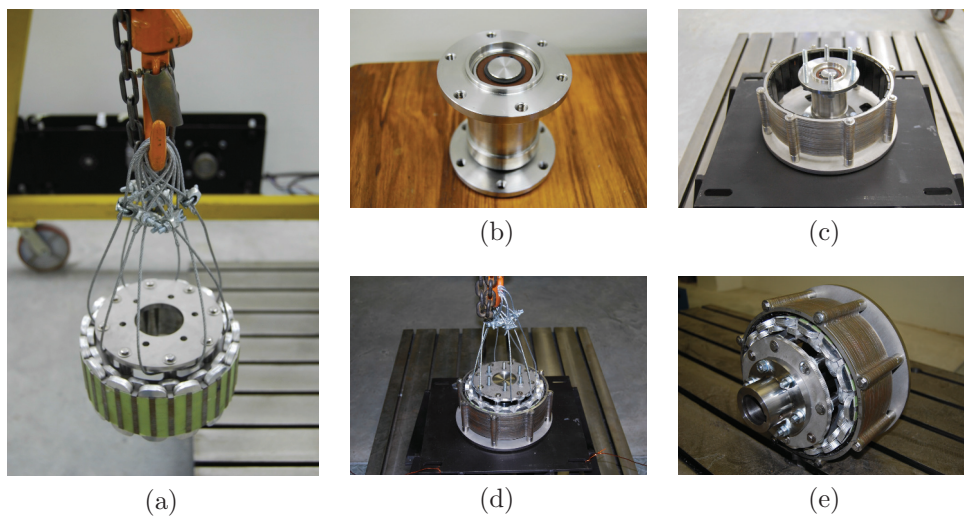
The final assembly, with (a) the wound rotor on a block and tackle, (b) the hub assembly, (c) the PM rotor attached to a mounting platform, (d) the wound rotor being lowered into place and (e) the completed slip coupler prototype.
